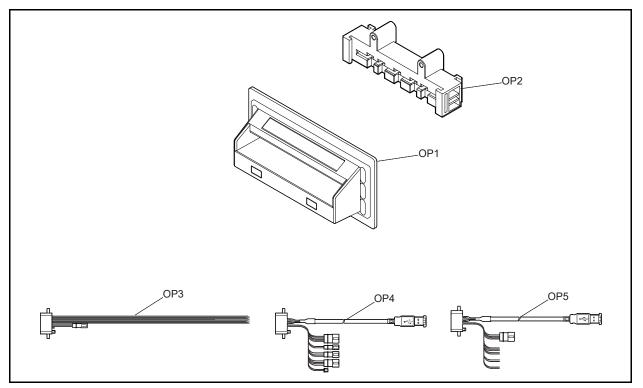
iVIZION Optional Components - Bezel/Harness Exploded Views
